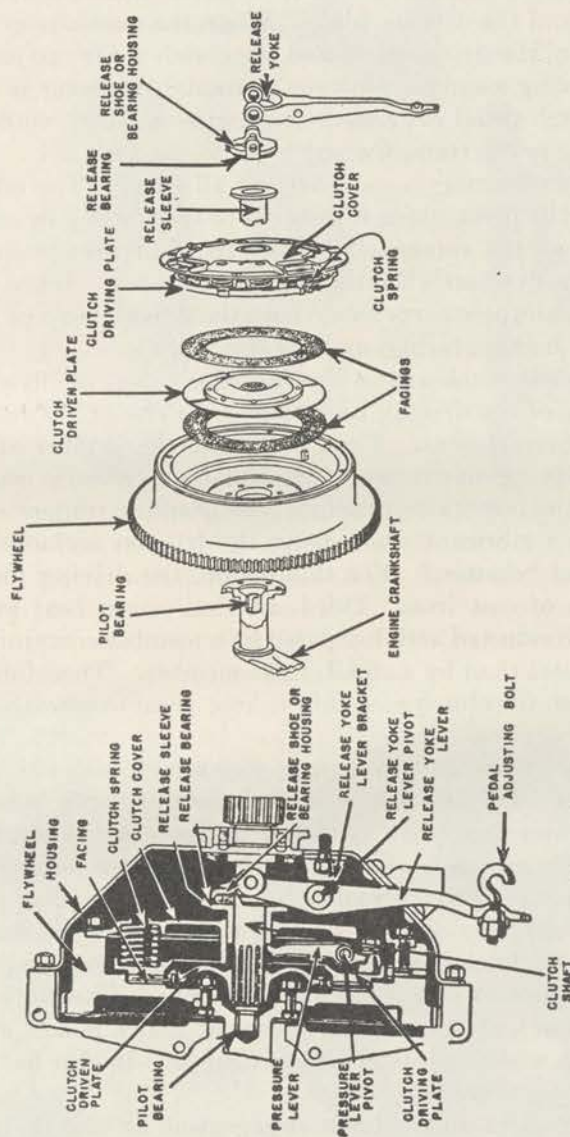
Exploded and cross sectional views of a plate clutch.
